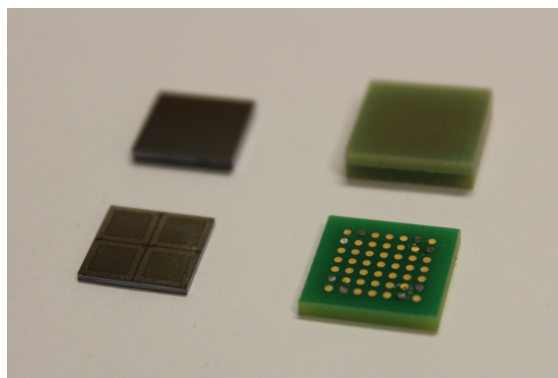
Two examples of solder assemblies used for testing with the nano-precision tester.
